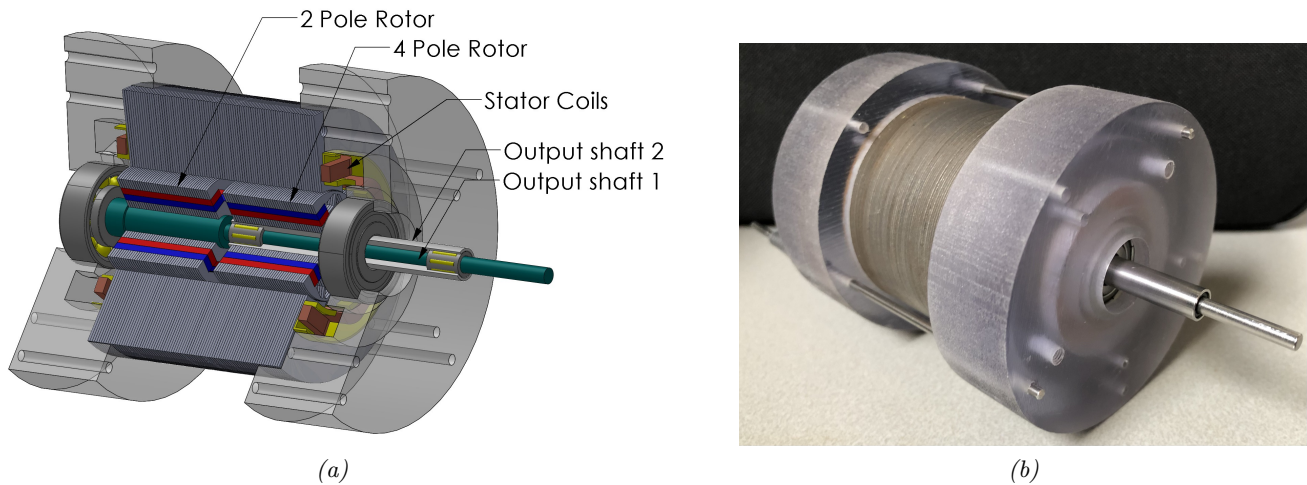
The figure above shows the solidworks model (a) with labels indicating the different parts of the multimotor assembly and the prototype (b) that was built of the multimotor featuring two output shafts that was used for the measurements.
